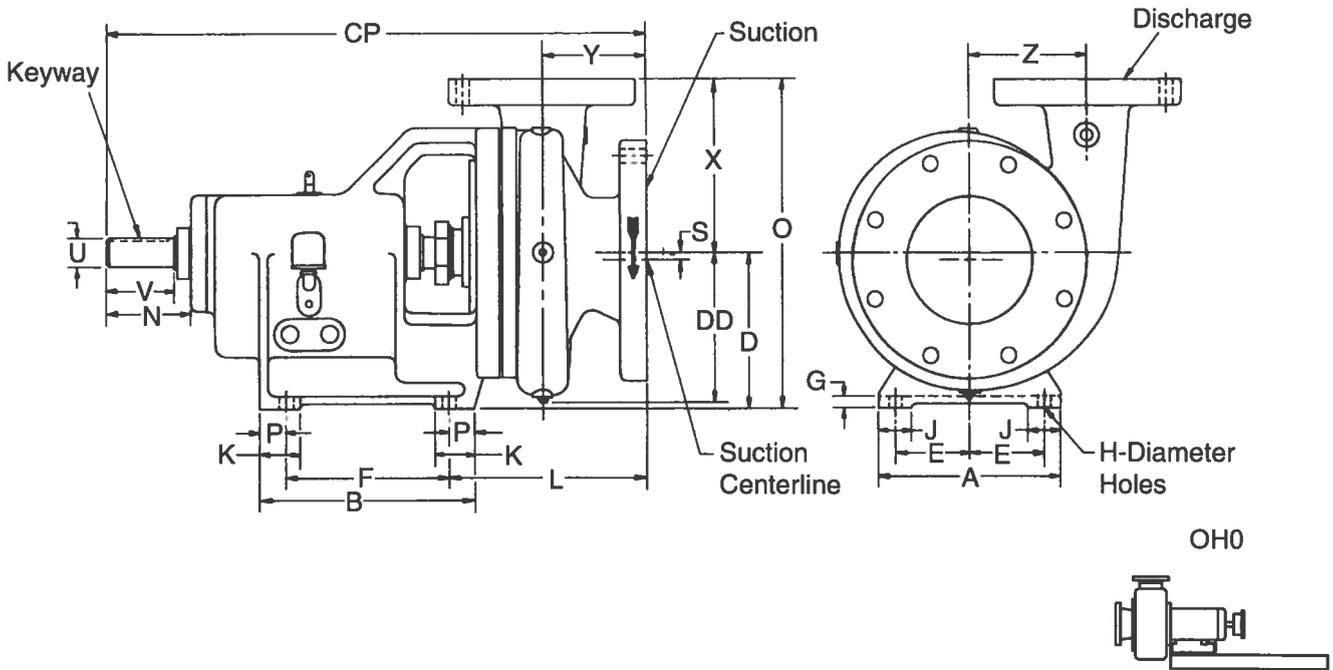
Overhung impeller – flexibly coupled – single stage – frame mounted
